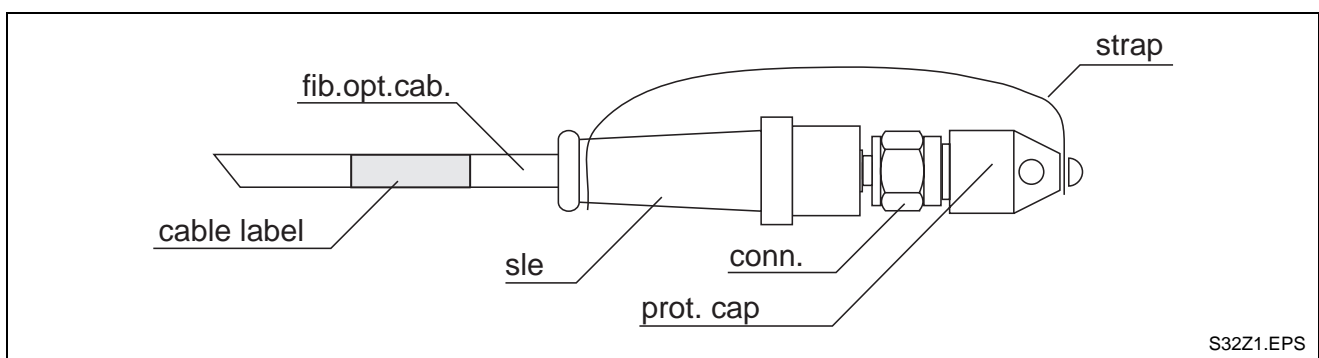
Illustrated FSMA connector 6.0 mm
